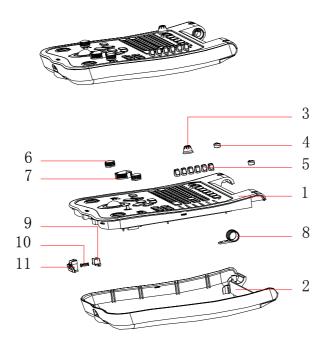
The exploded drawing (1) of the keyboard assembly
